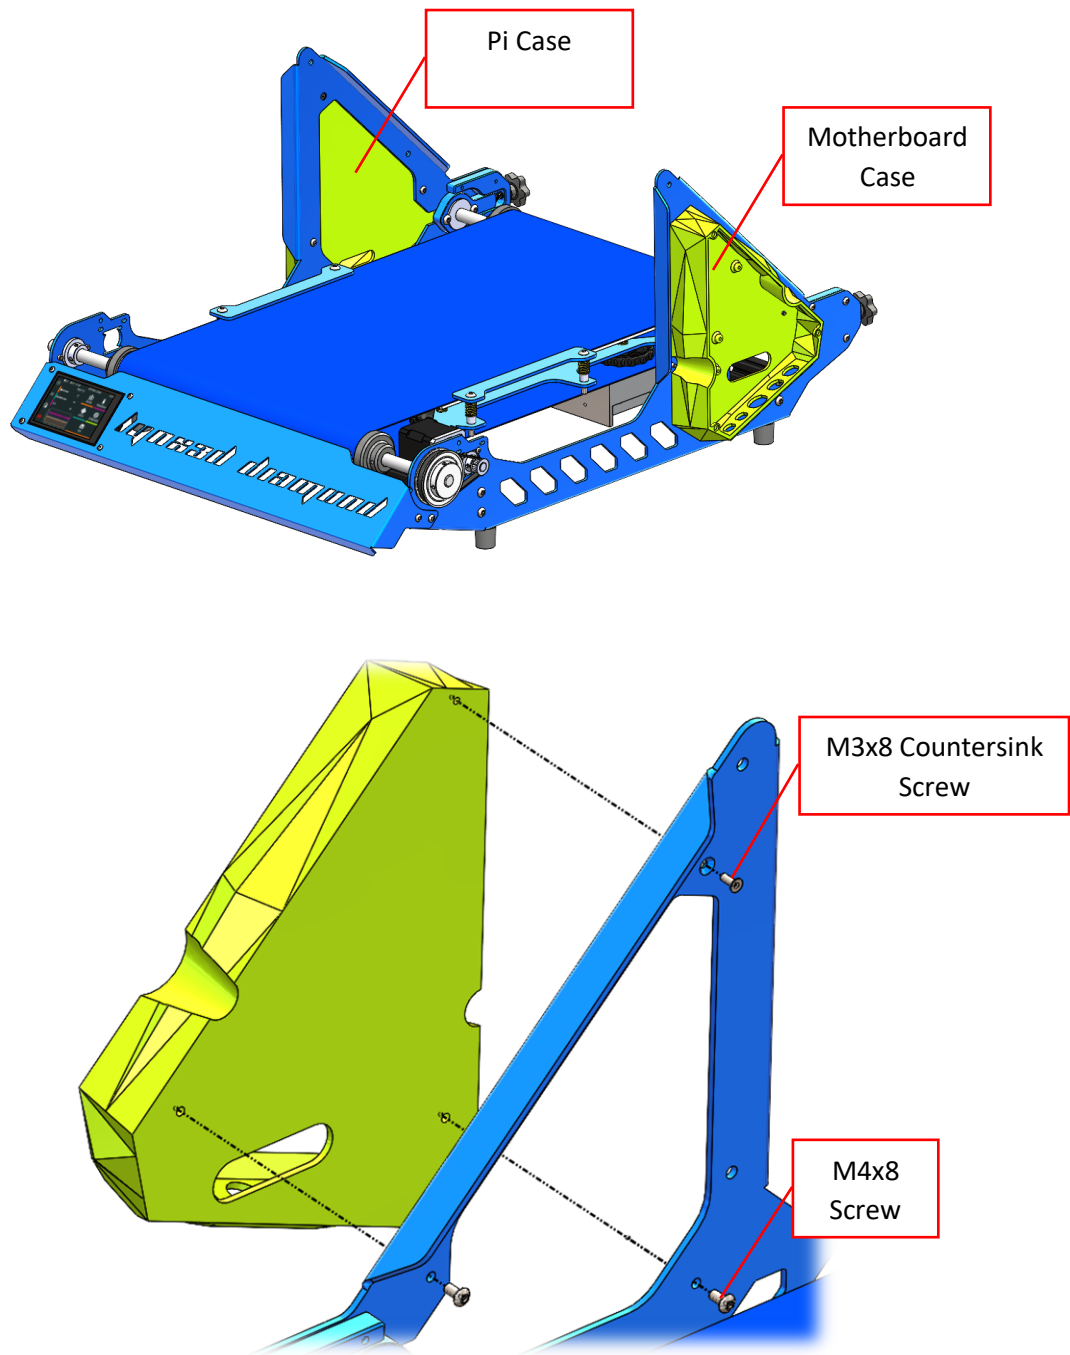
Fixing detail for Motherboard box, repeat process on the left side
